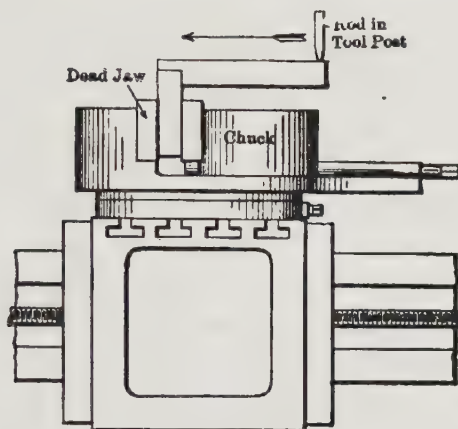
Testing Accuracy of Travel of Shaper Tool.
